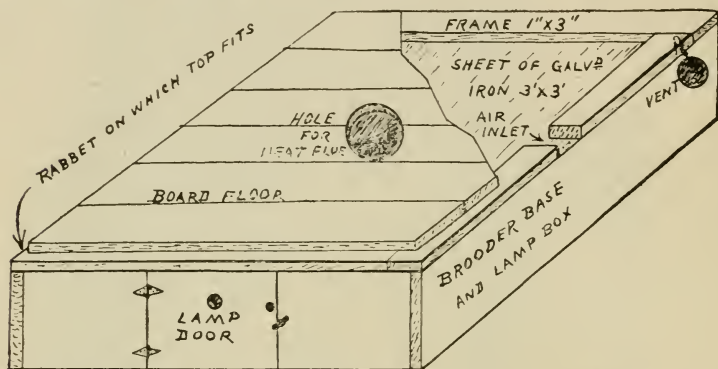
Plan of home-made Brooder Base with cut away section showing construction of hot air chamber.
